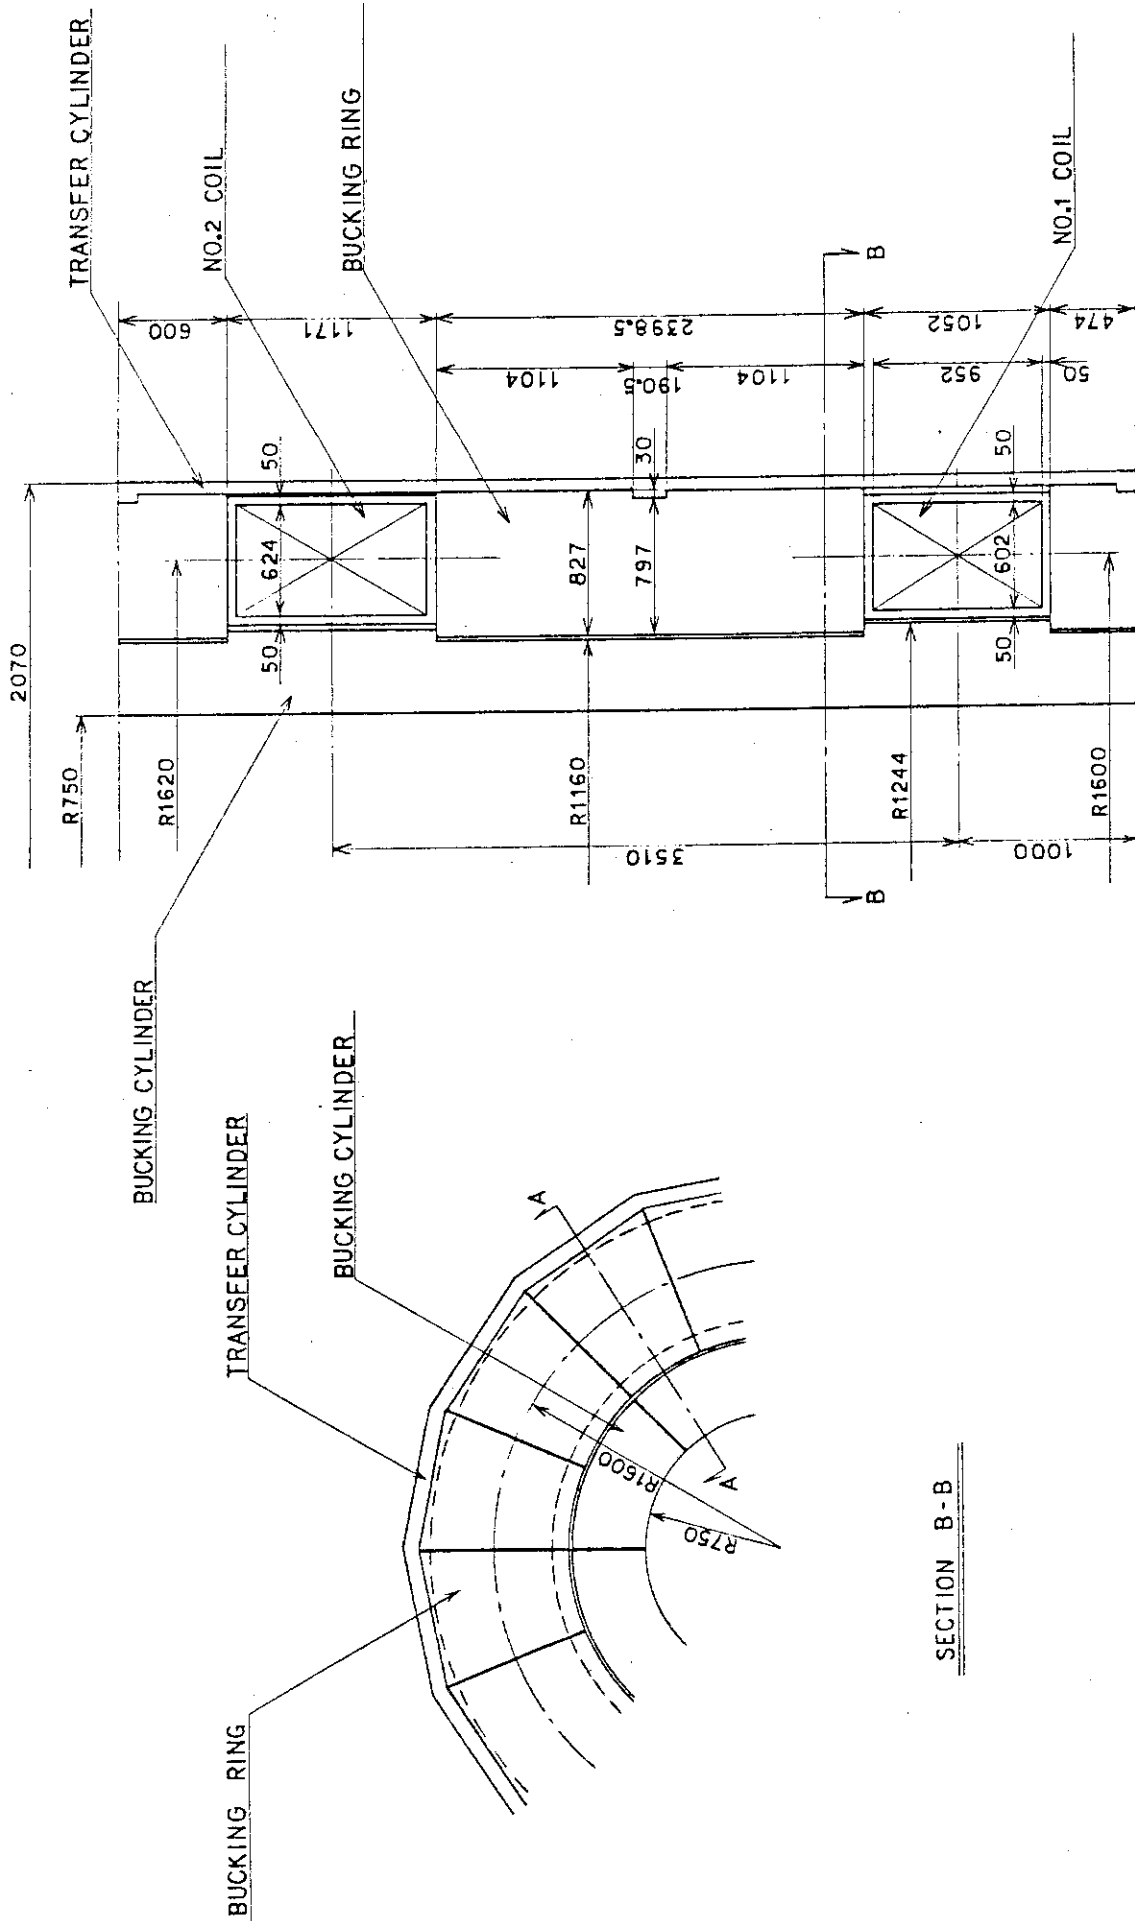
Center Column Ass'y (SPTR Power Plant)
